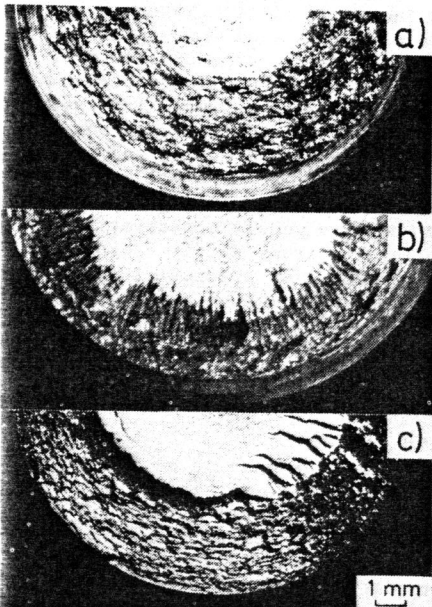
Macroscopic fracture surfaces (final fracture in liquid nitrogen)
